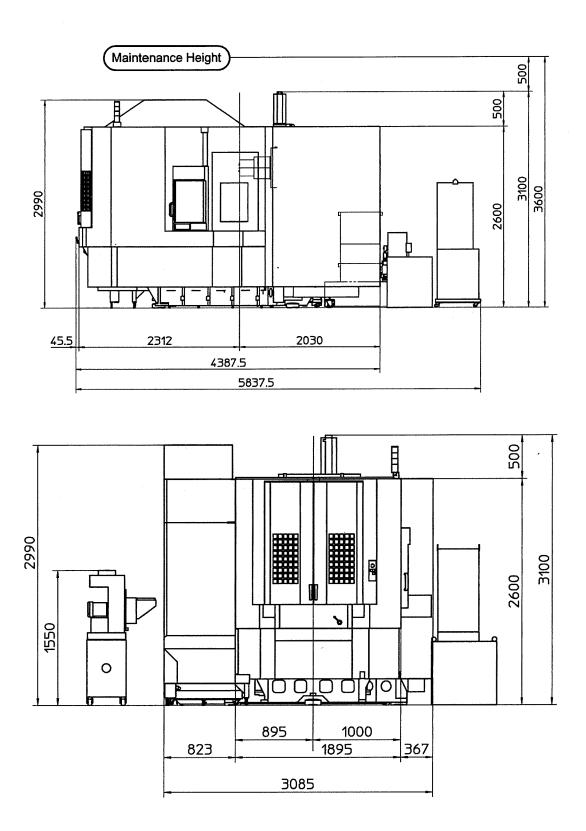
Front and Side View of Machine (Tool Magazine A60 and Left Discharge Lift-Up Conveyor Spec.)
